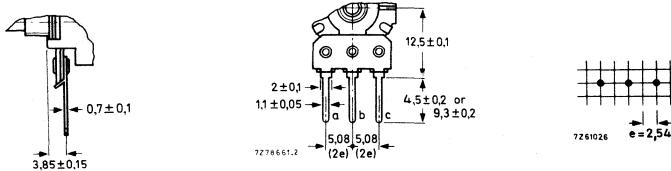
Long or short printed-wiring pins (single potentiometer).
